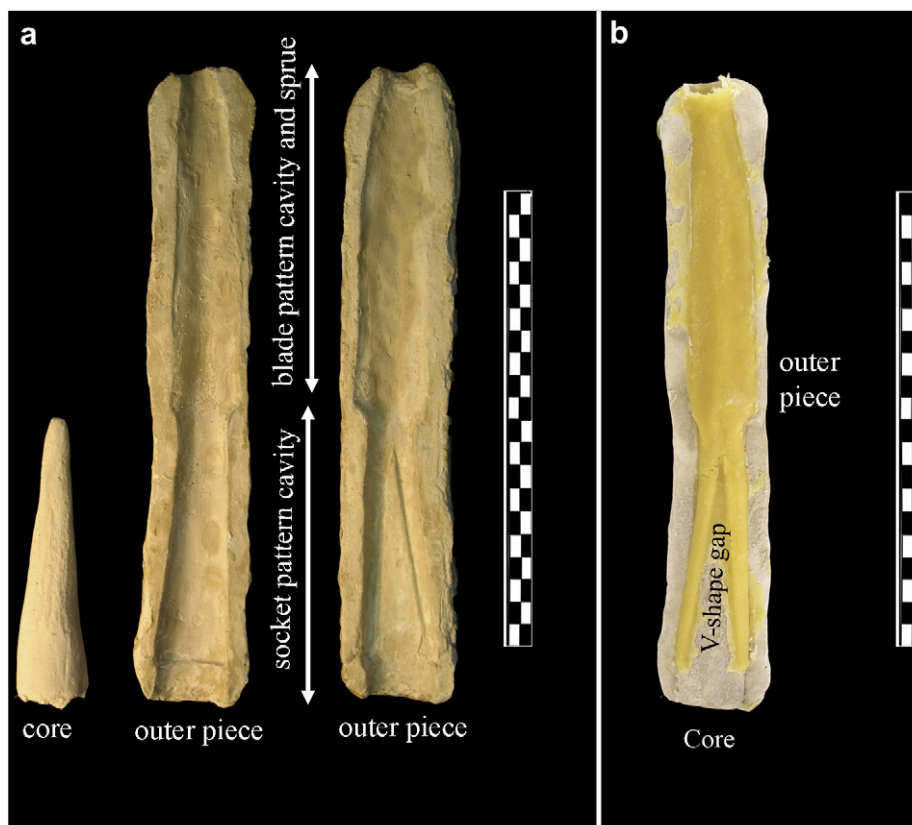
Multiple-piece experimental mould of clay used for casting wax models of socketed spearhead; (a) the mould is composed of two outer pieces that create the external shape and a core that creates the socket's interior shape; and (b) wax rough casting of a socketed spearhead showing the V-shape gap.
